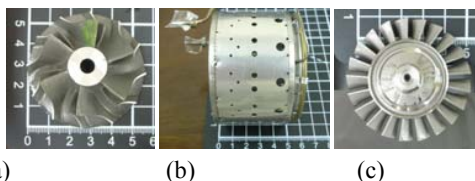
Pictures of the major parts in MGT. (a) Compressor (b) Combustion chamber (c) Turbine wheel
